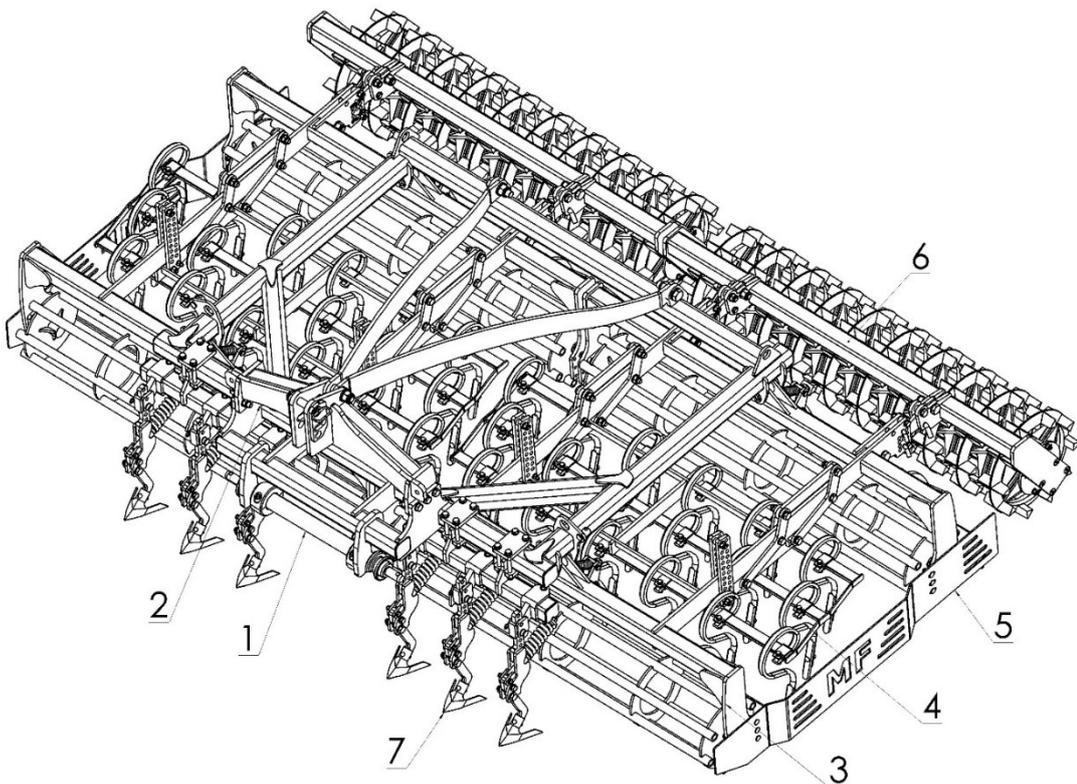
Pre-sowing spring-type cultivator: beam of the lower rods, 2- cultivator frame, 3- lower frame with tubular rollers and leveller, 4- sections of working components, 5- edge shields, 6- re-consolidating crosskill roller, 7- trace openers (OPTIONAL)
